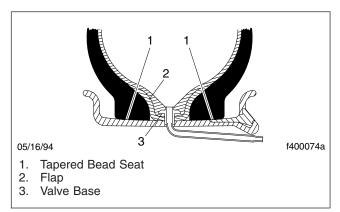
, Position of Beads, Flap, and Tube at 4 to 5 psi (28 to 35 kPa)
